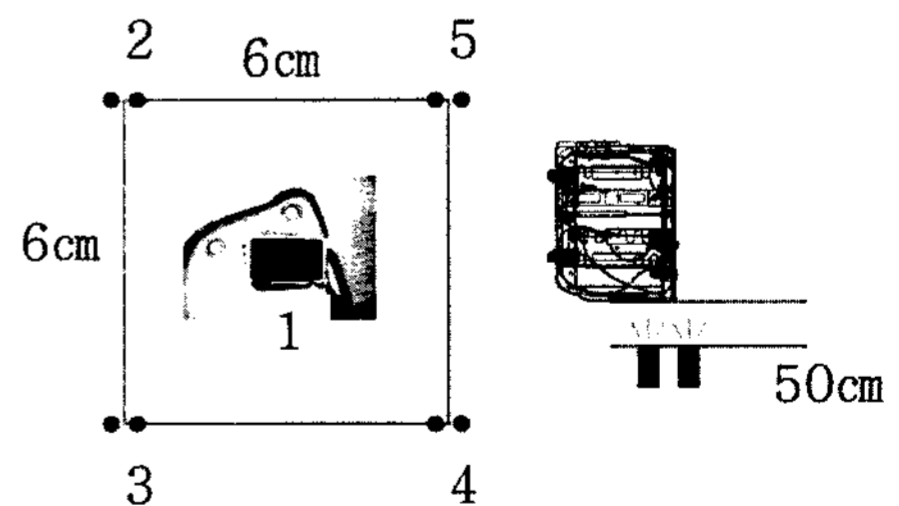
Illumination setup for width/length of welding bead inspection
